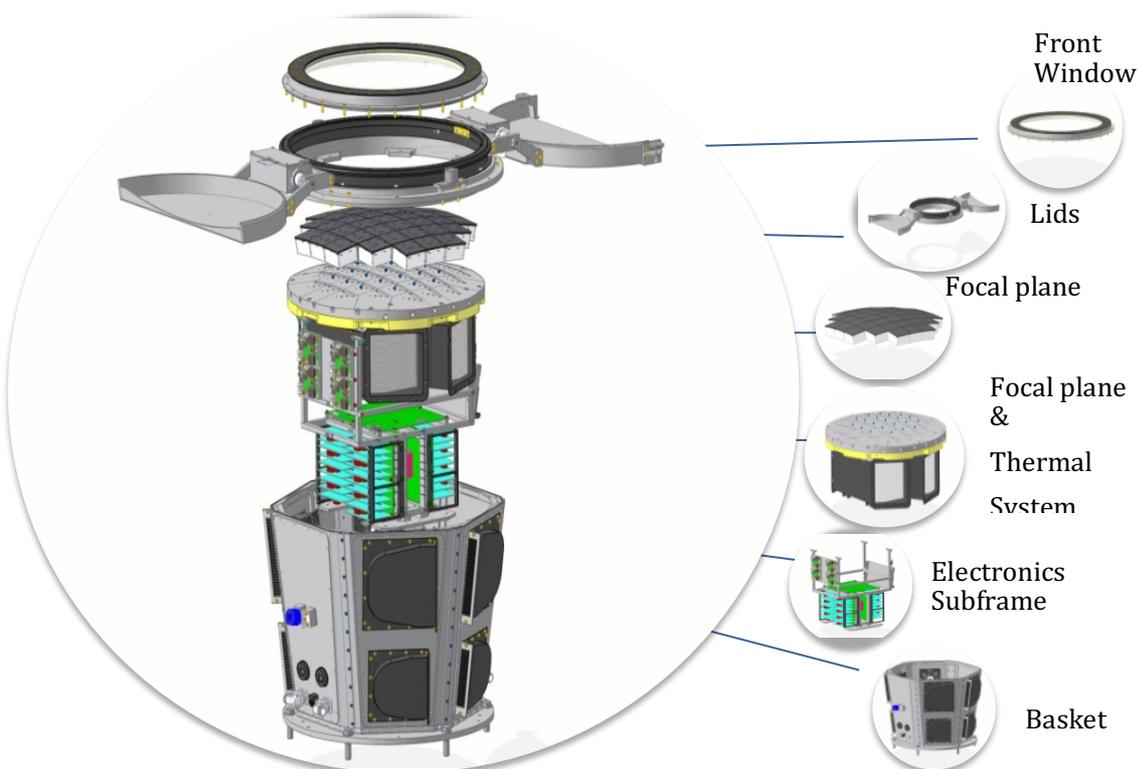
3D rendering of the ASTRI camera prototype - Exploded view
